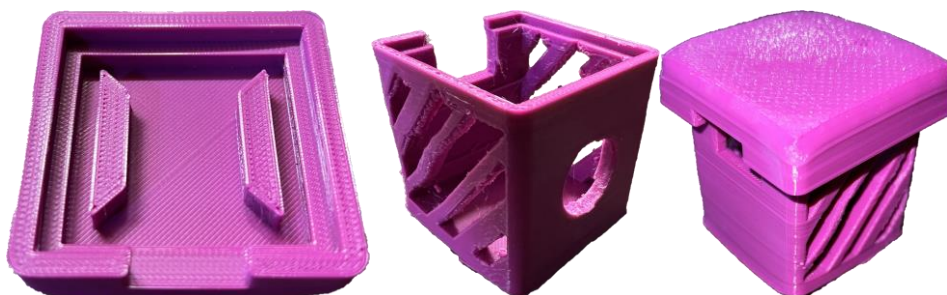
Prototype 1 Printing of the Solar Encasing Assembly
